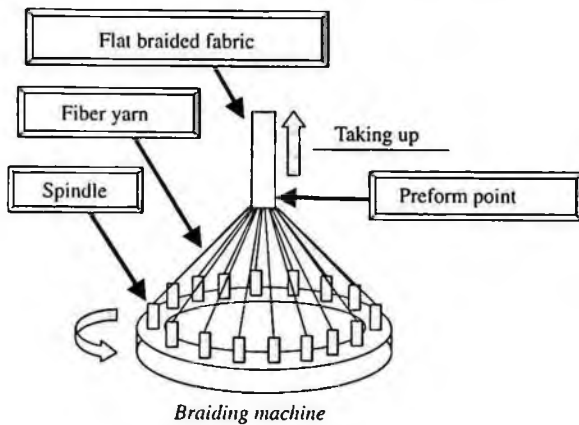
Spindle rotation and taking-up movement of a flat braiding machine.
